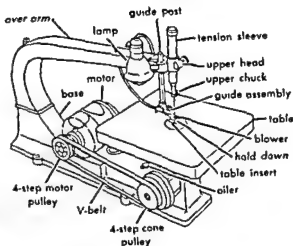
Scroll saw cuts sharp turns in thin pieces (Delta)
